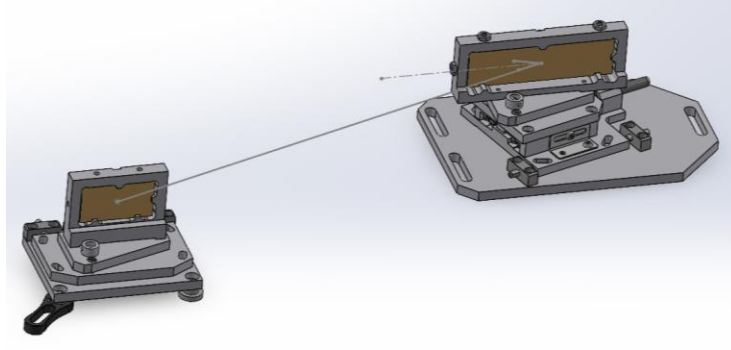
Grating compressors and mounts, designed by Dr. Kohei Hoshimoto.
